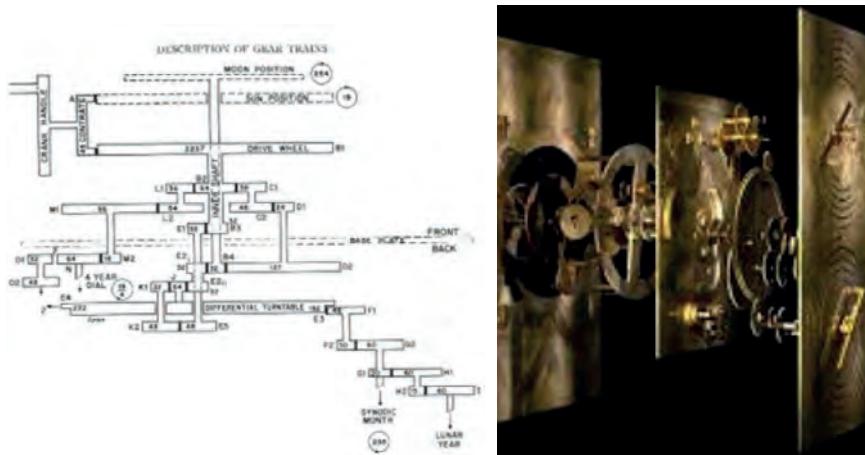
An example of mechanism design used in study of history of machines. Left: a drawing model of Antikythera machine. Right: a reconstruction via a prototype.
